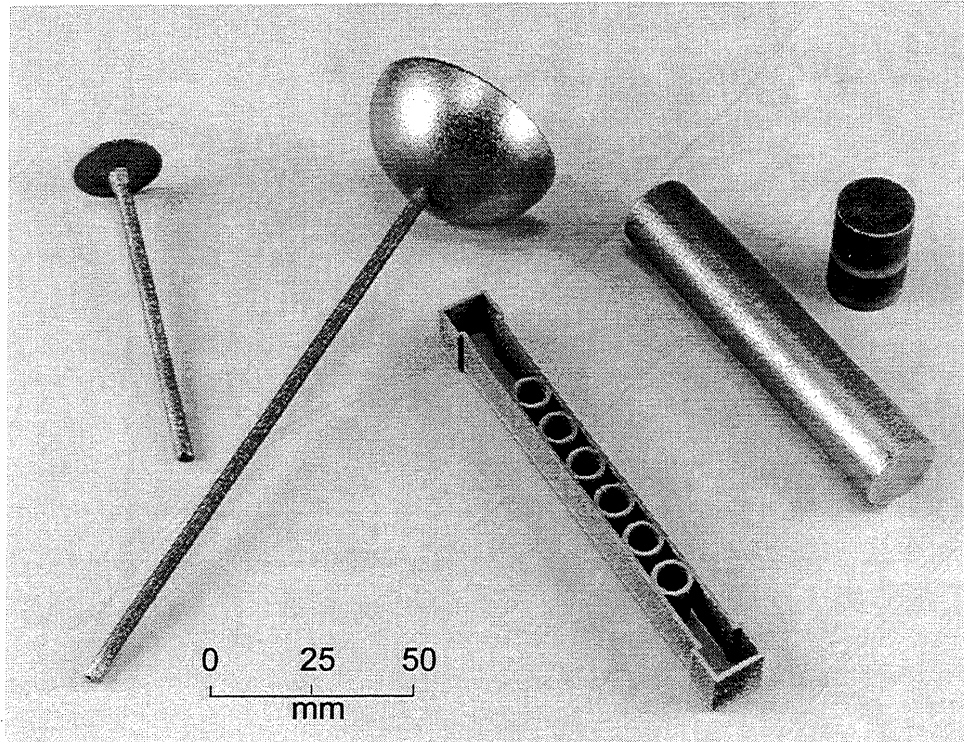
Representative DLF parts and assemblies. From left to right, tantalum stem and disc, 316 stainless steel stem and hemisphere, 316 stainless steel tube assembly and housing, and Inconel 690 solid cylinders.
